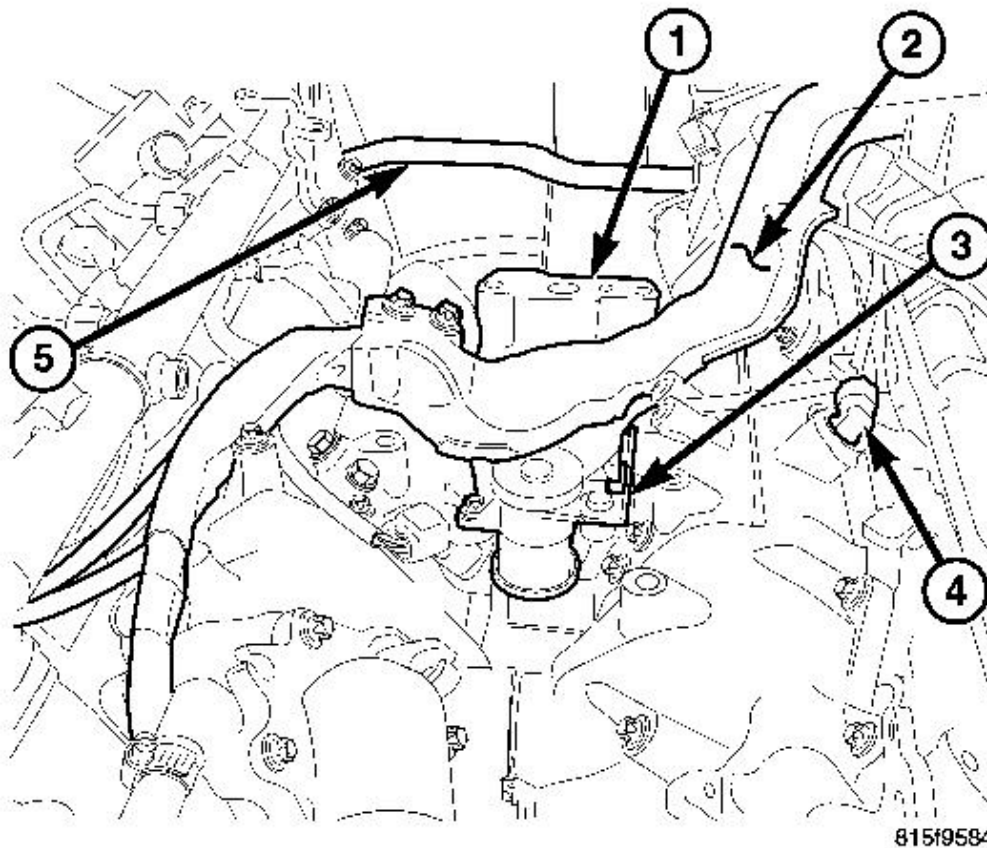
Turbocharger Oil Housing Adapter, Main Engine Wiring Harness, Swirl Valve Actuator & Coolant Temperature Sensor
